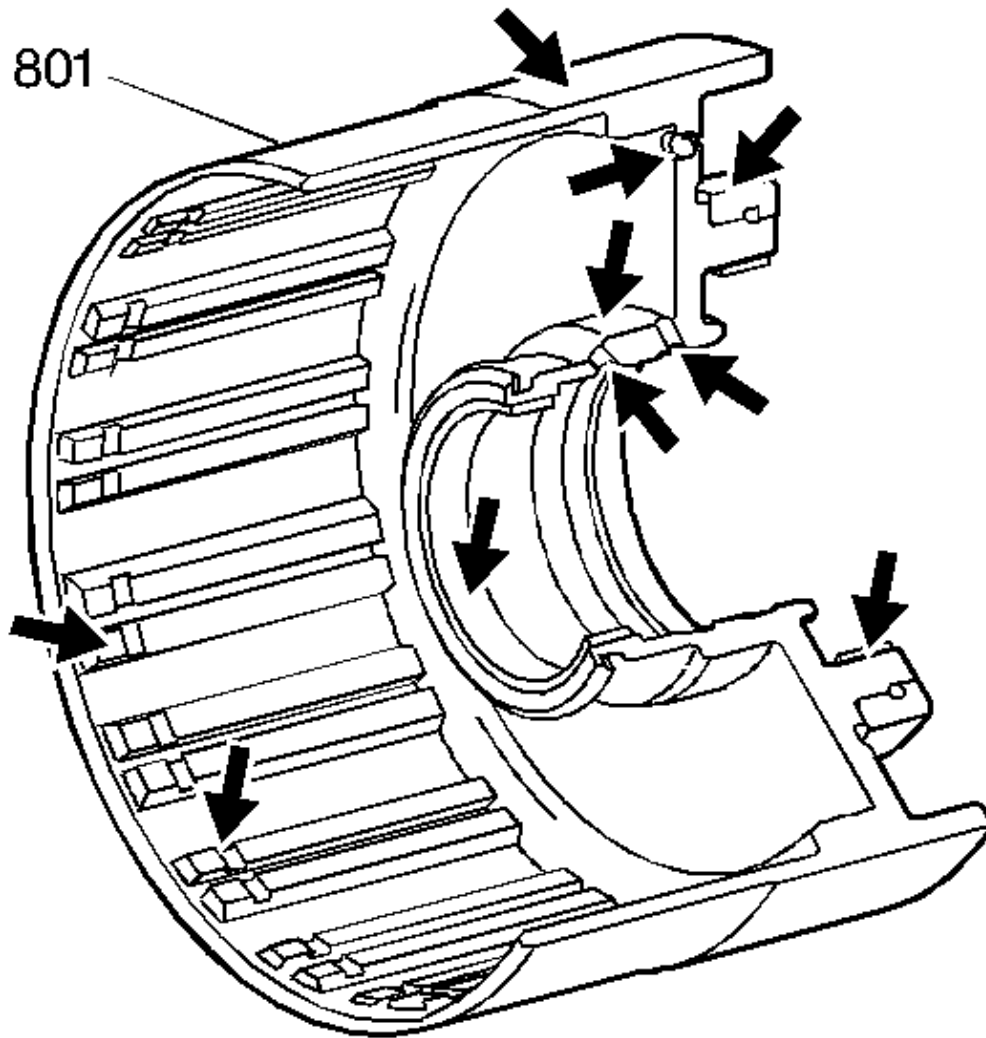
Identifying Inspection Areas On Forward And Coast Clutch Housing
